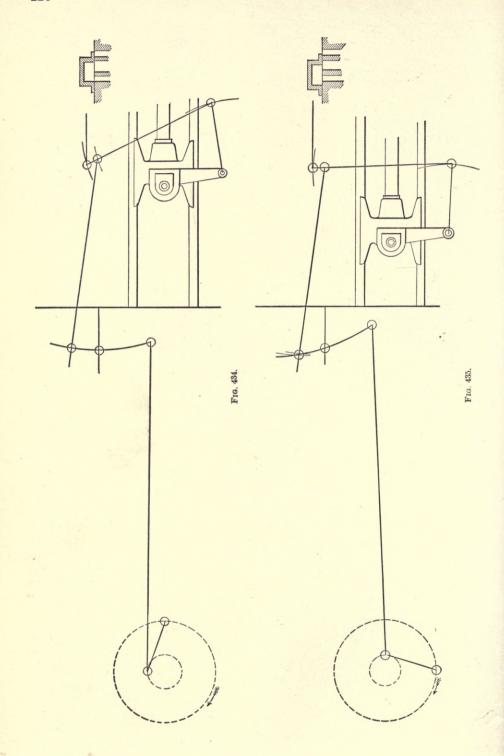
, 433, 434, 435 are drawings of the Walschaert valve gear. In this gear the valve derives its motion partly from the piston-rod crosshead and partly from a single eccentric moving a vibrating link.
